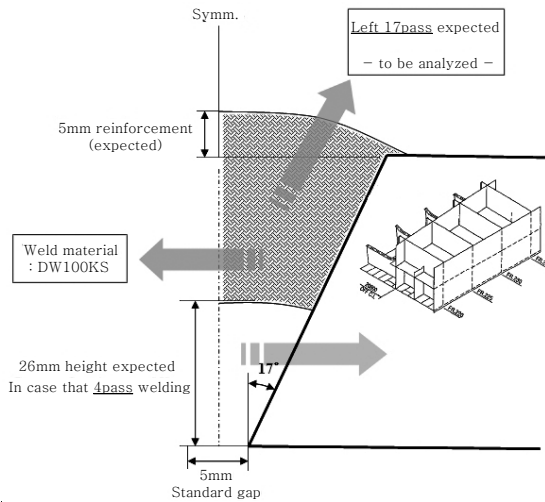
A Section of butt-welding line in 60mm ship block plate
